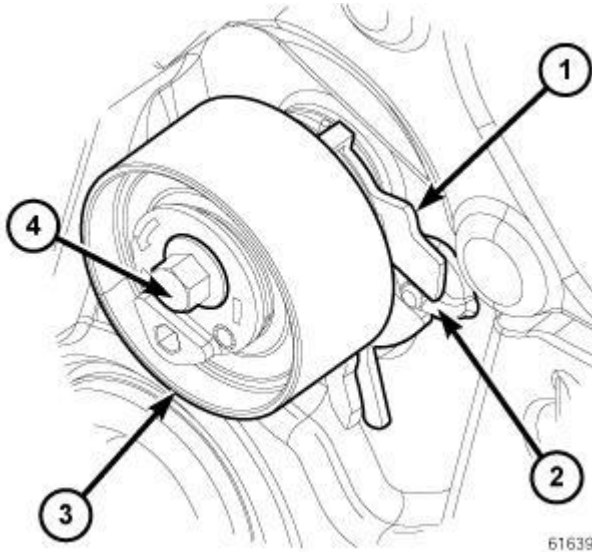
Timing Belt Tensioner Alignment Plate, Engine Cover Boss & Bolt
